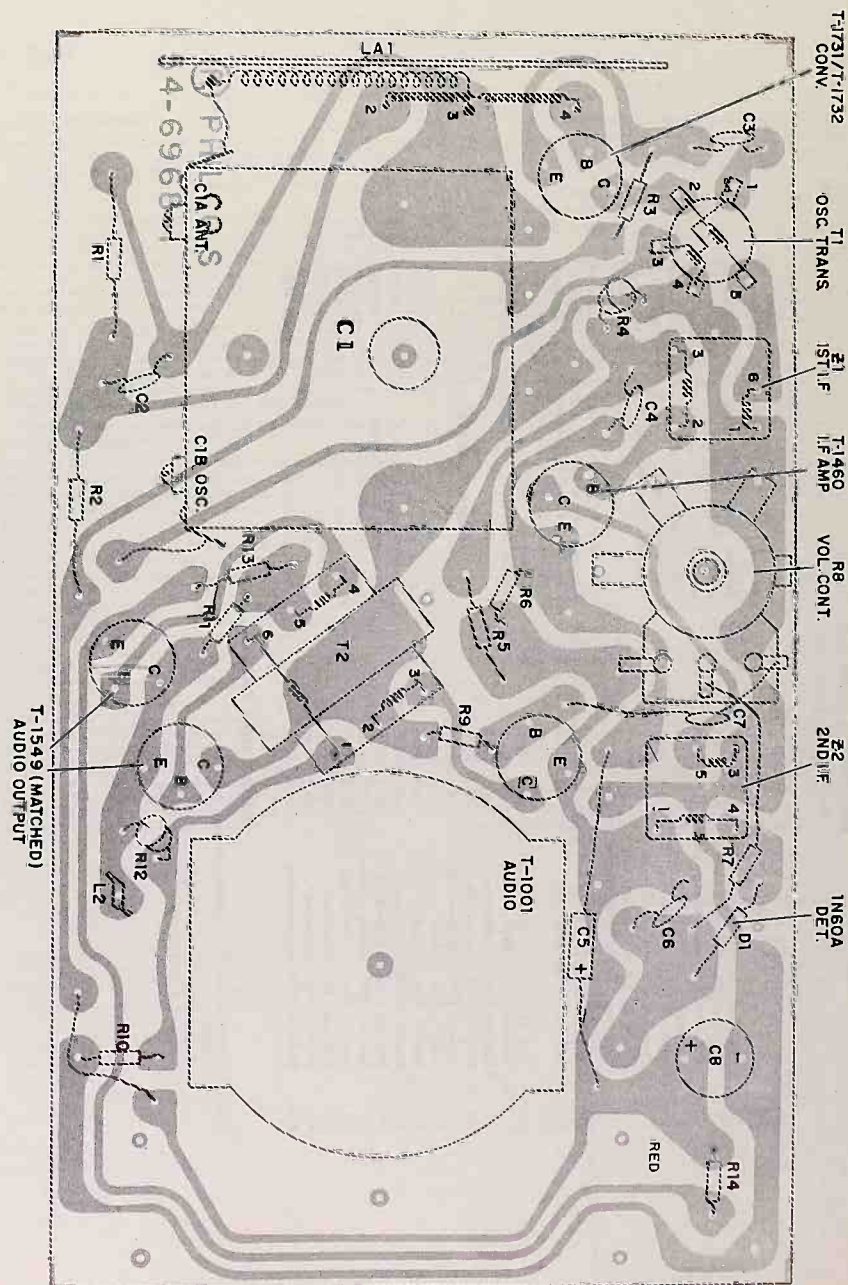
Printed Wiring Panel—Under Side Showing Parts Location
